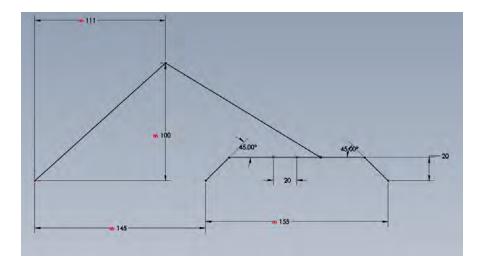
Driving sketch of the SolidWorks design. Any of the important parameters seen here could be changed without causing rebuild and carry-through errors within the Assembly.
